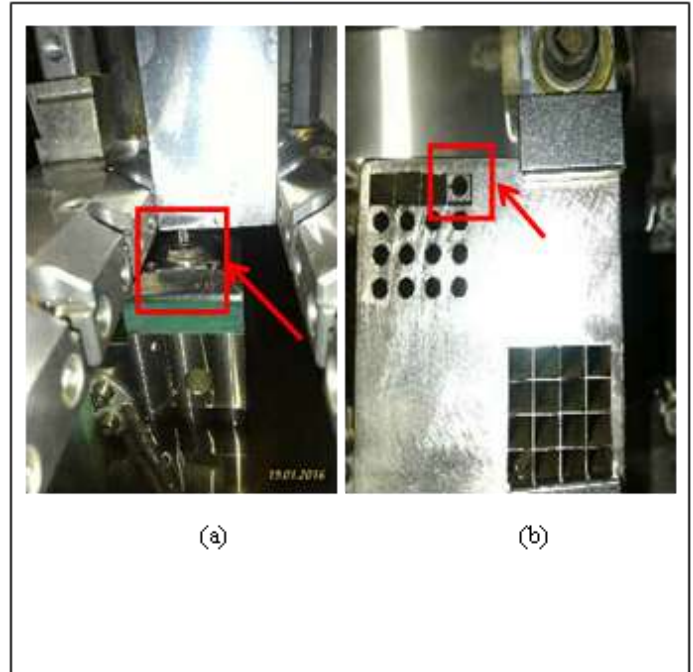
Slug removal issues (a) Slug fallen on lower nozzle and (b) Slug jammed in slot.
